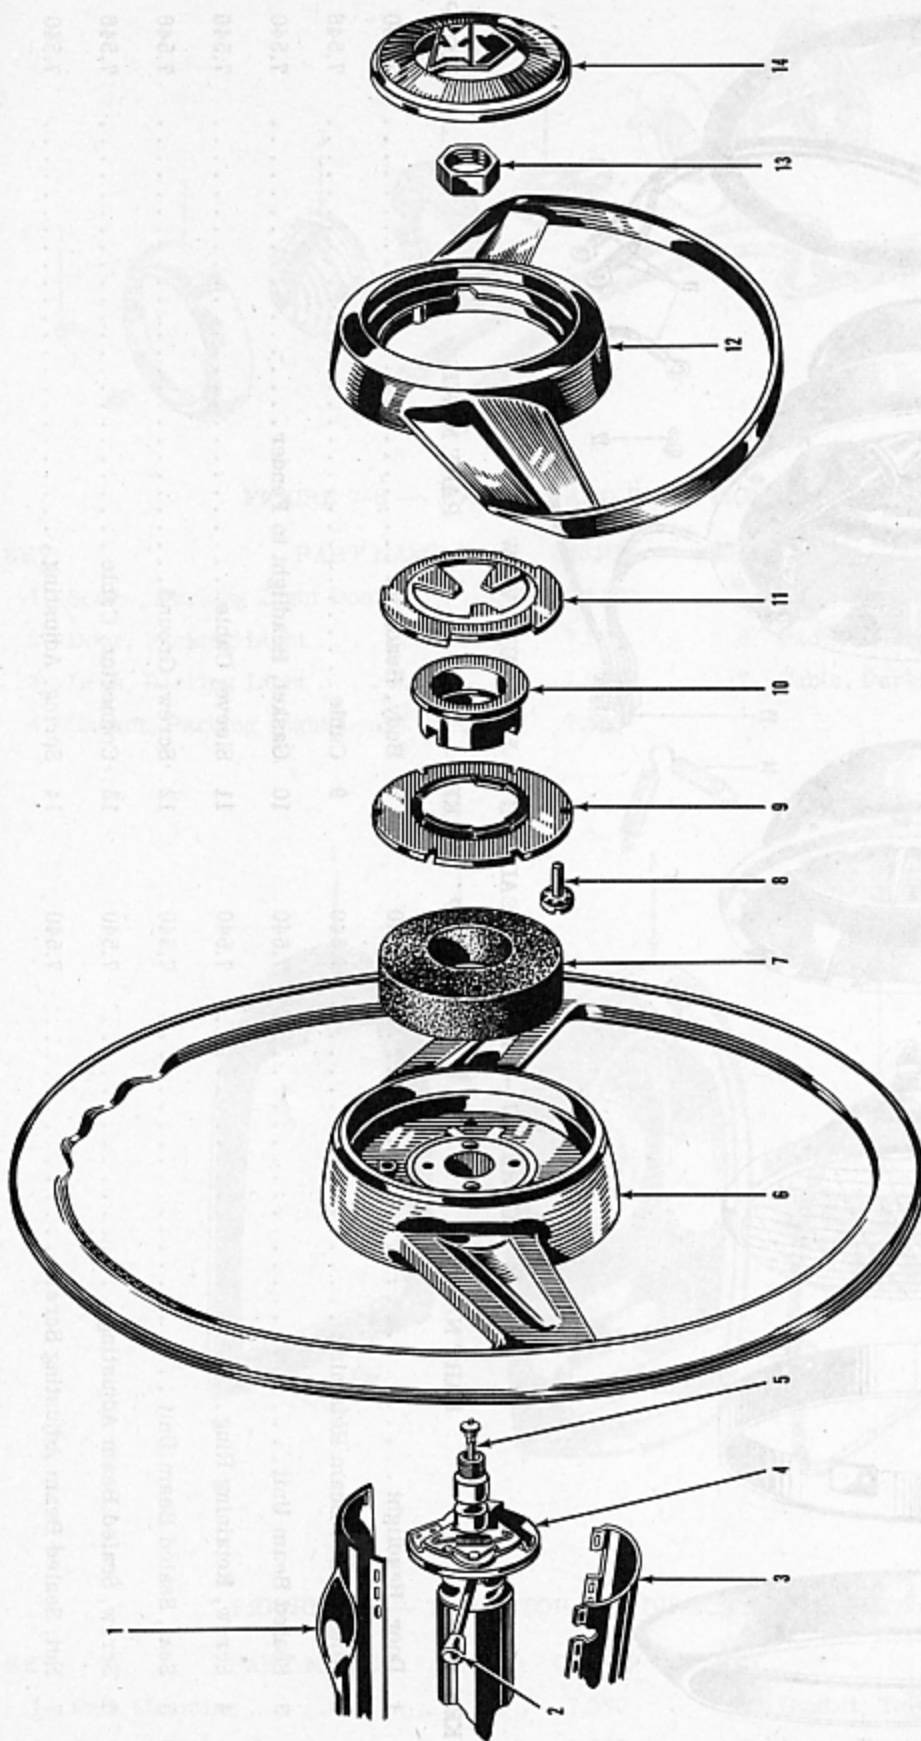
HORN BLOWING MECHANISM - EXPLODED VIEW
